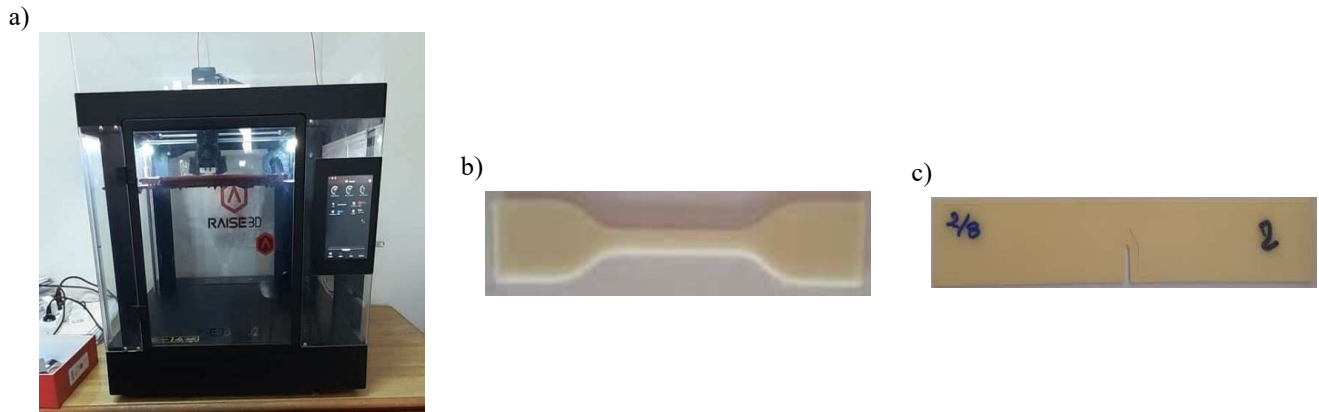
a) RAISE 3D printer, b) Dogbone test specimens and c) SENT test specimens
